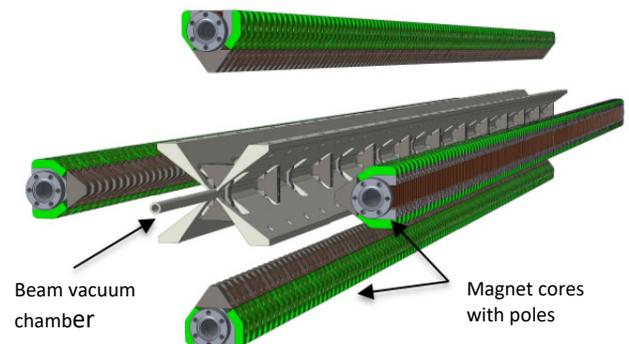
Exploded view of SCAPE magnet with a beam chamber.
